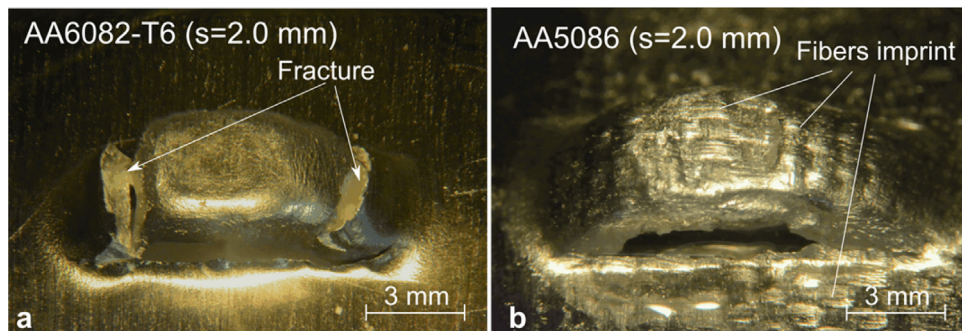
Fracture produced by clinching process on: (a) more brittle (AA6082); and (b) more ductile (AA5086) aluminum alloys using rectangular tools.
